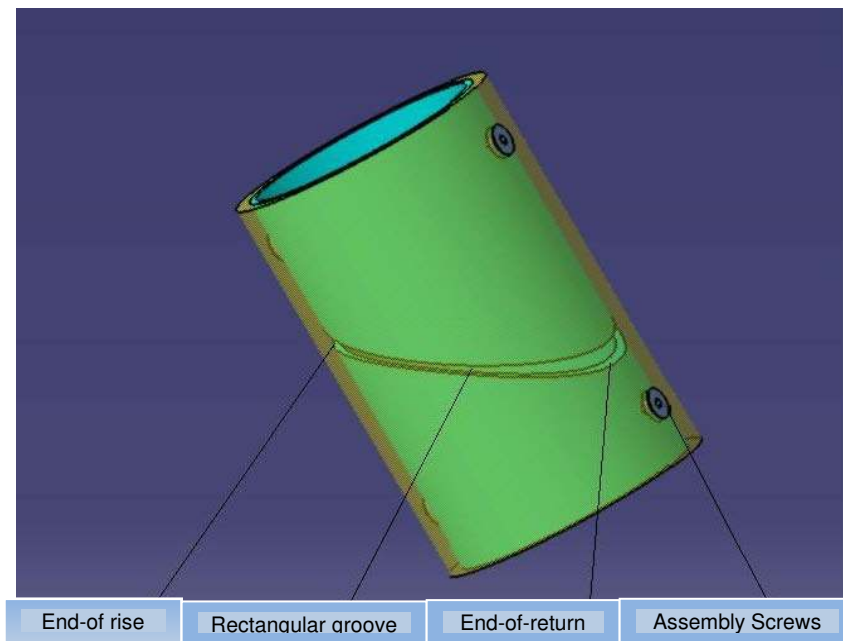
Schematic Picture showing the crosssection of the cylindrical cam which drives the needles. To enable assembly, it is made in two parts, upper and lower portions are fixed to a cylindrical bushing by bolts.
